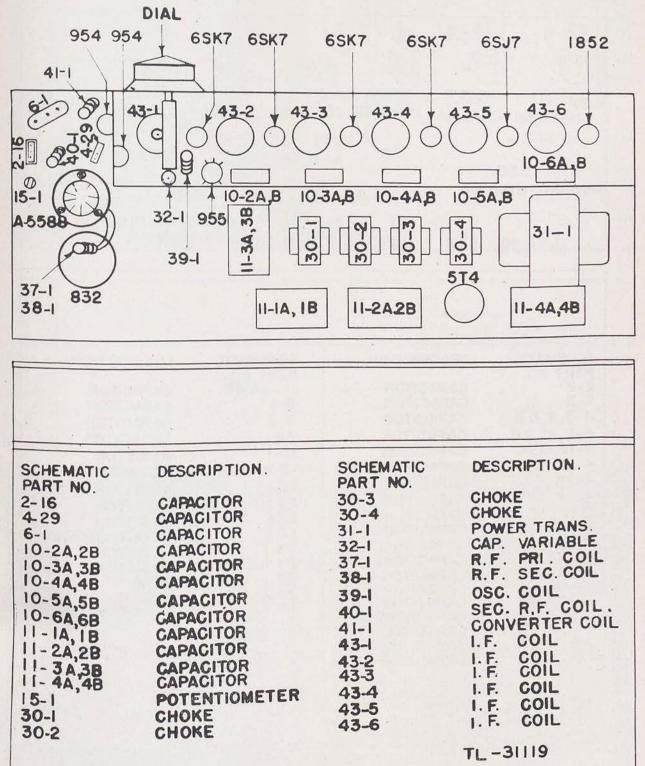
Receiver BC-404-C, diagram showing location of parts (10p of chassis).
